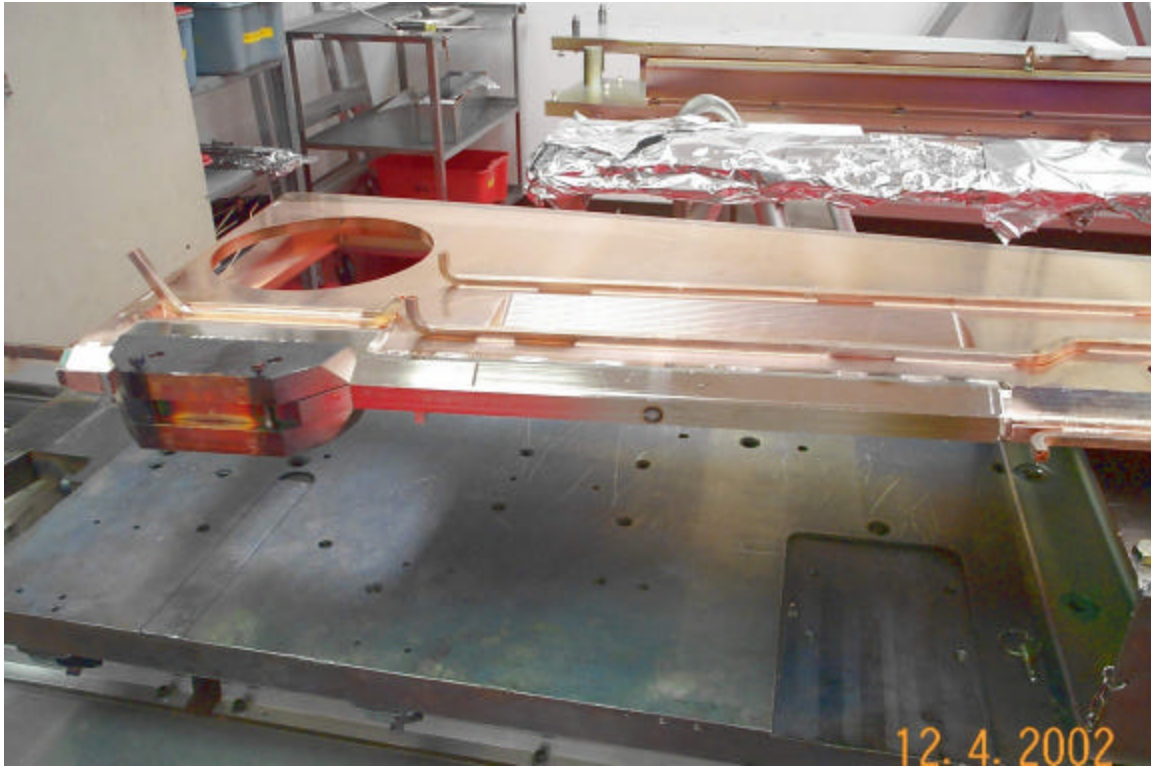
MCA BM1, Eddy Break Long Weld
